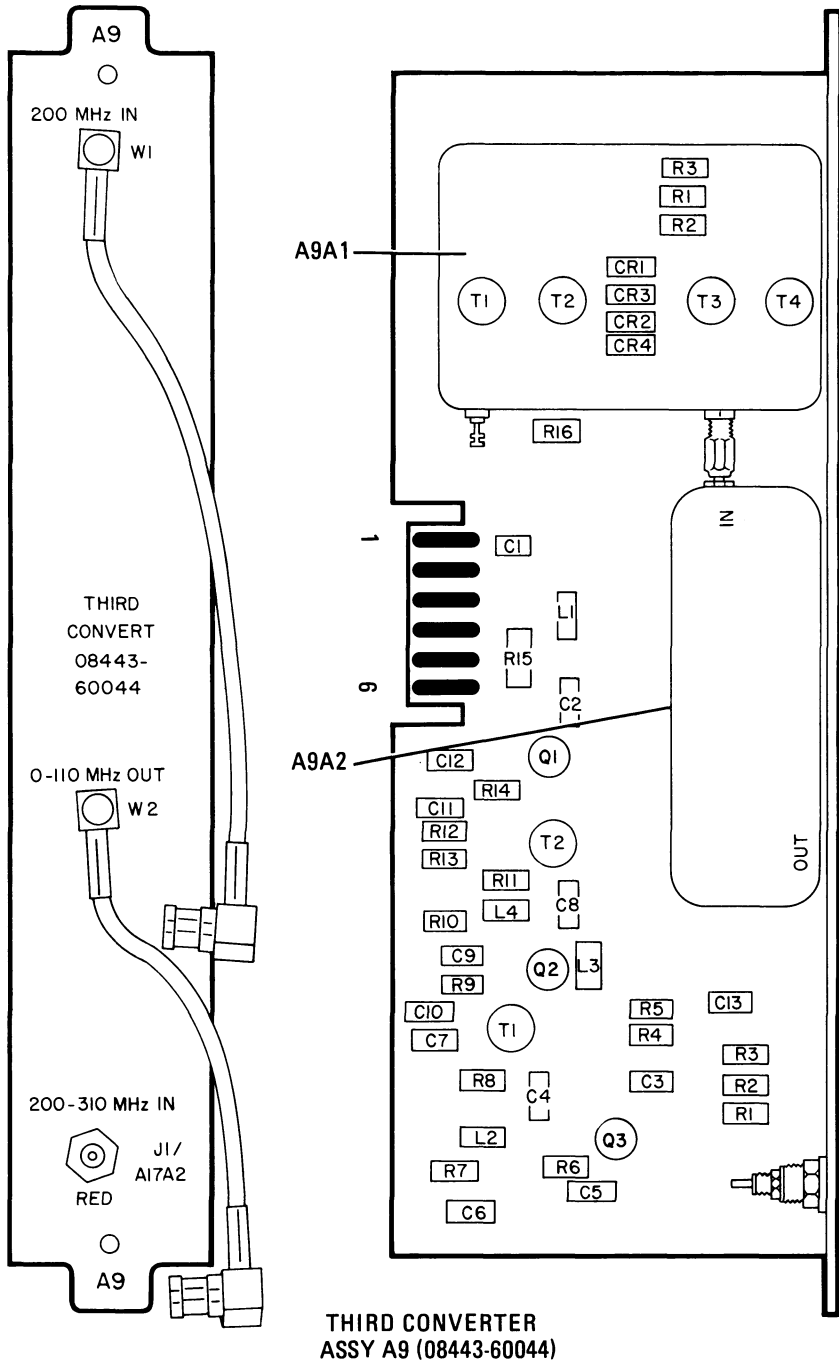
Third Converter Assembly A9 Parts Locations (1 of 2)
